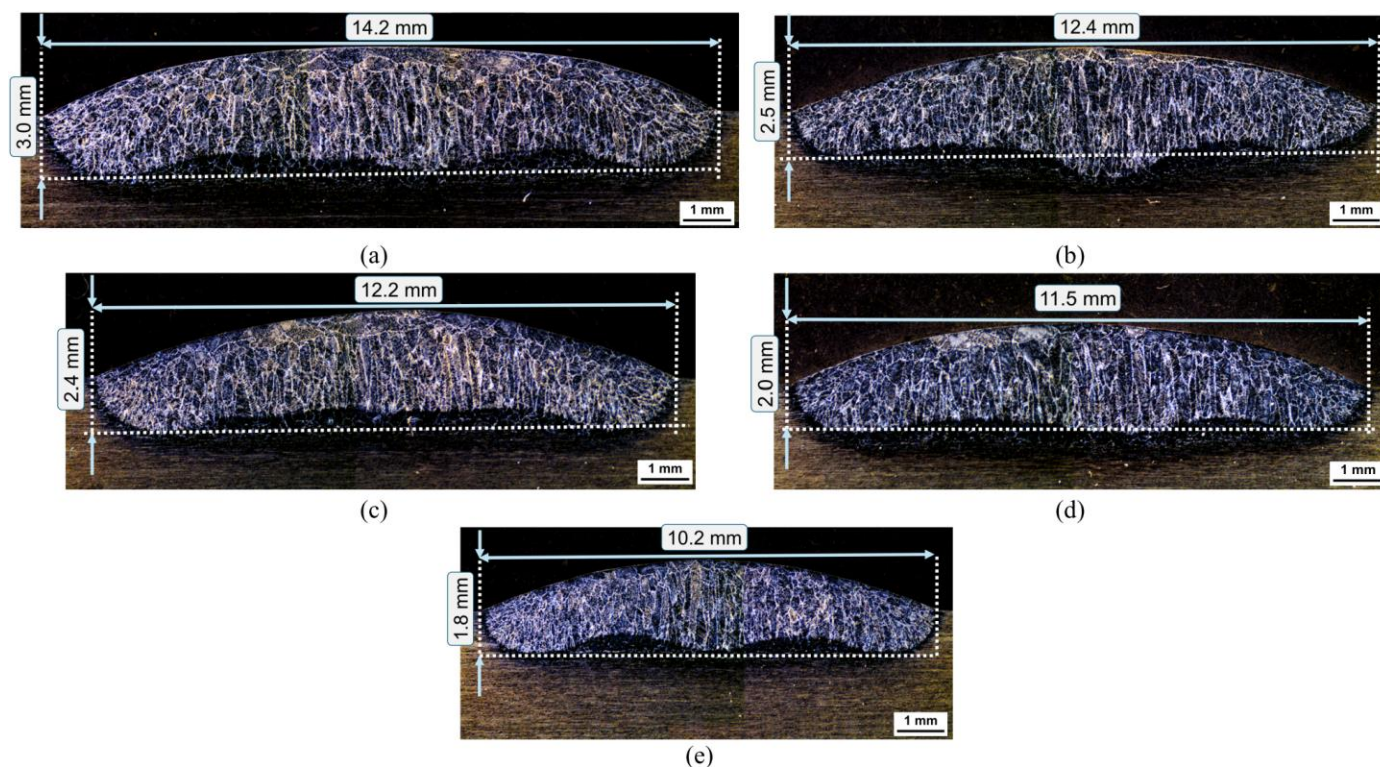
Macrostructure of weld bead cross-sections with several HI conditions: (a) Weld 1 – $1.1 \text{ kJ}\cdot\text{mm}^{-1}$; (b) Weld 2 – $0.87 \text{ kJ}\cdot\text{mm}^{-1}$; (c) Weld 3 – $0.82 \text{ kJ}\cdot\text{mm}^{-1}$; (d) Weld 4 – $0.79 \text{ kJ}\cdot\text{mm}^{-1}$; (e) Weld 5 – $0.59 \text{ kJ}\cdot\text{mm}^{-1}$
